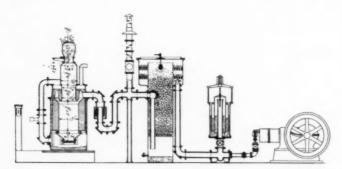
Sectional Drawing of Suction Gas Producer and Gas Engine Shown Below
